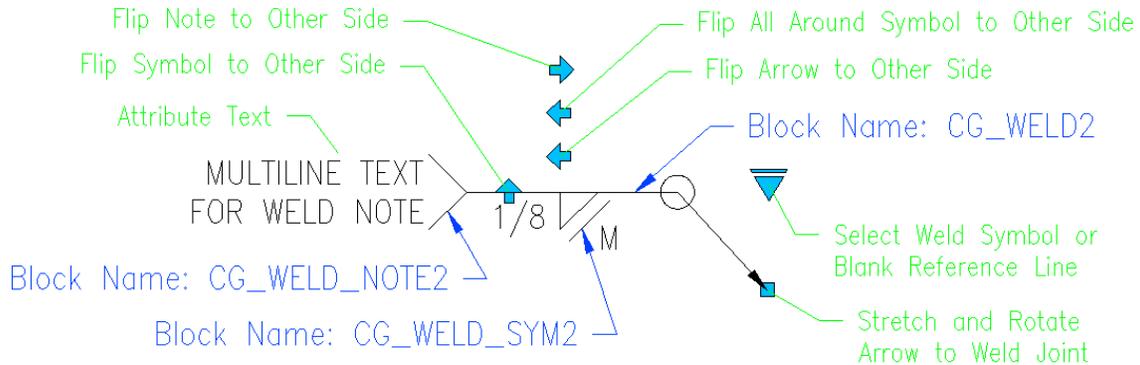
Combined Welding Symbol Blocks with Dynamic Grip Explanation
